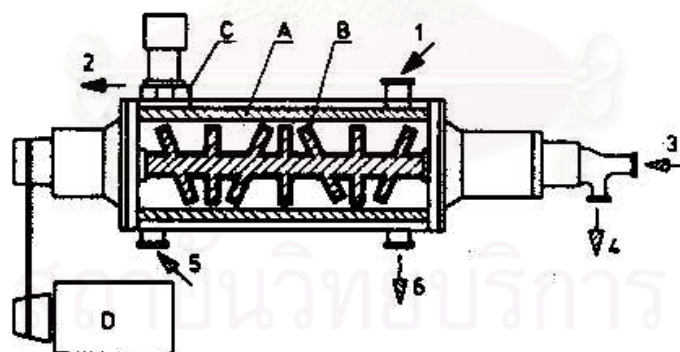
Simplified drawing of the Netzsch model LM-20 mill; (A) cylindrical grinding vessel with cooling jacket; (B) agitator with cooled shaft and disks; (C) annular vibrating slot separator, (D) variable speed drive motor; (1) product inlet; (2) product outlet; (3) agitator cooling inlet; (4) agitator cooling outlet; (5) vessel cooling inlet; (6) vessel cooling outlet
